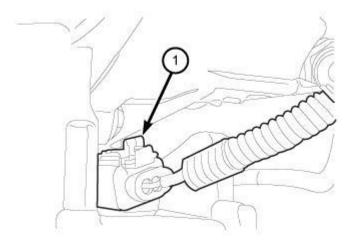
Steering Gear & Knuckle/Rotor Assembly Courtesy of CHRYSLER GROUP, LLC
